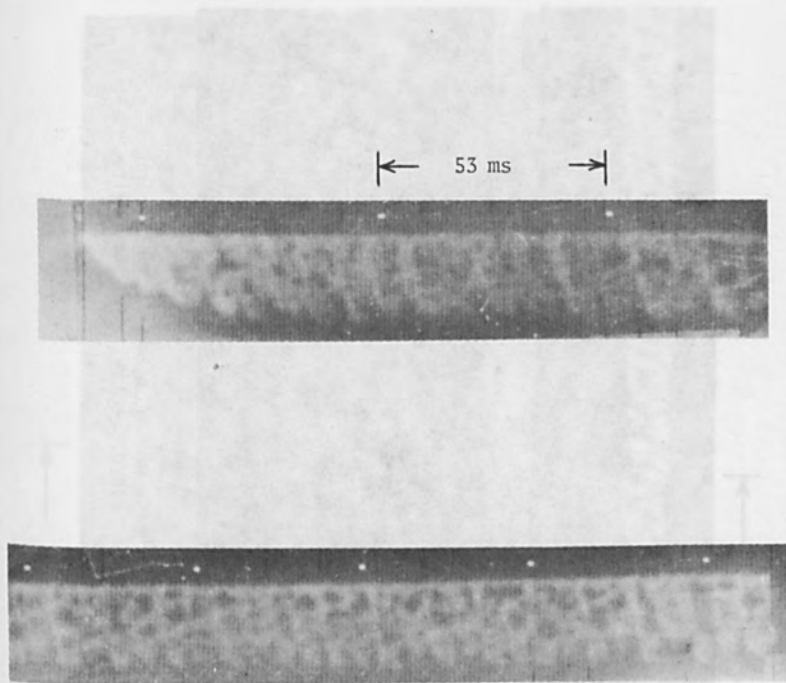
X-ray exposures showing start (top) and end (bottom) of a weld (150 kv, 10 ma, 22 ipm) on 410 stainless steel.<sup>5</sup>
